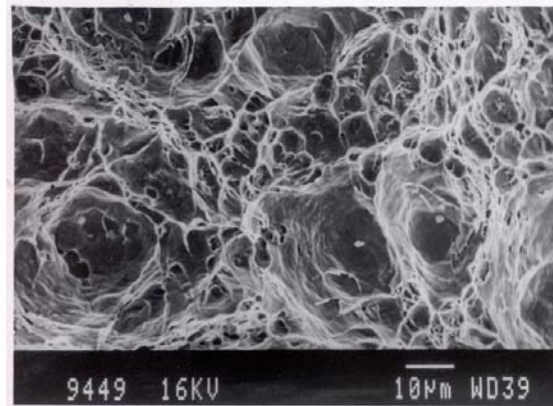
(a) SEM fractograph of fractured surfaces of J integral tested CL specimen at 28°C
